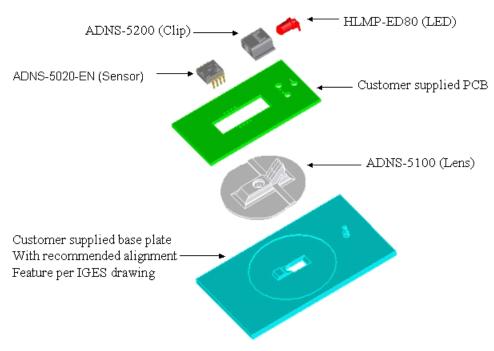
Exploded view drawing of optical tracking engine with ADNS-5020-EN optical mouse sensor.
